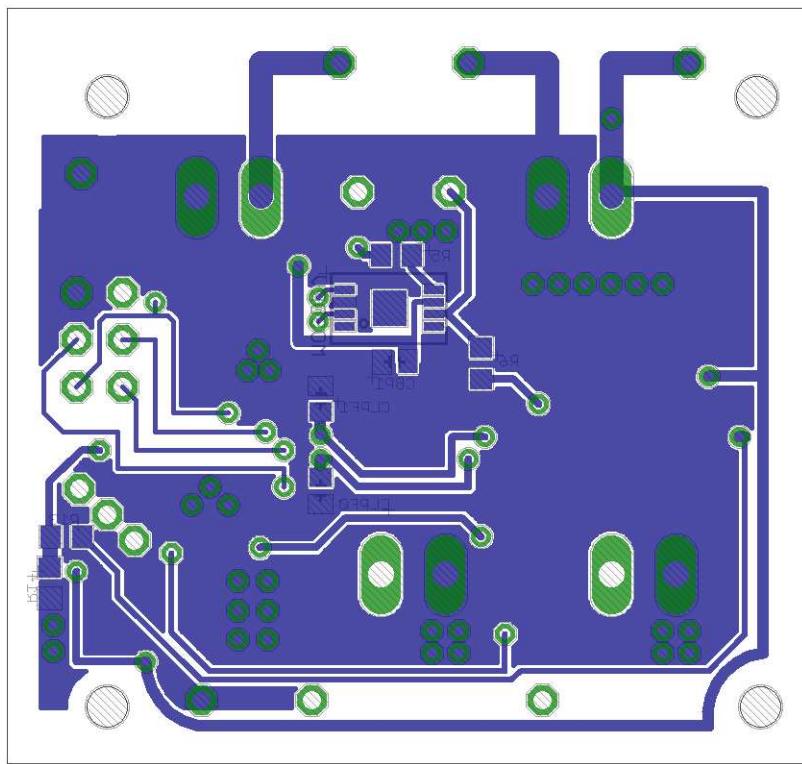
Converter PCB layout, bottom copper, silkscreen, and solder stop layers.
